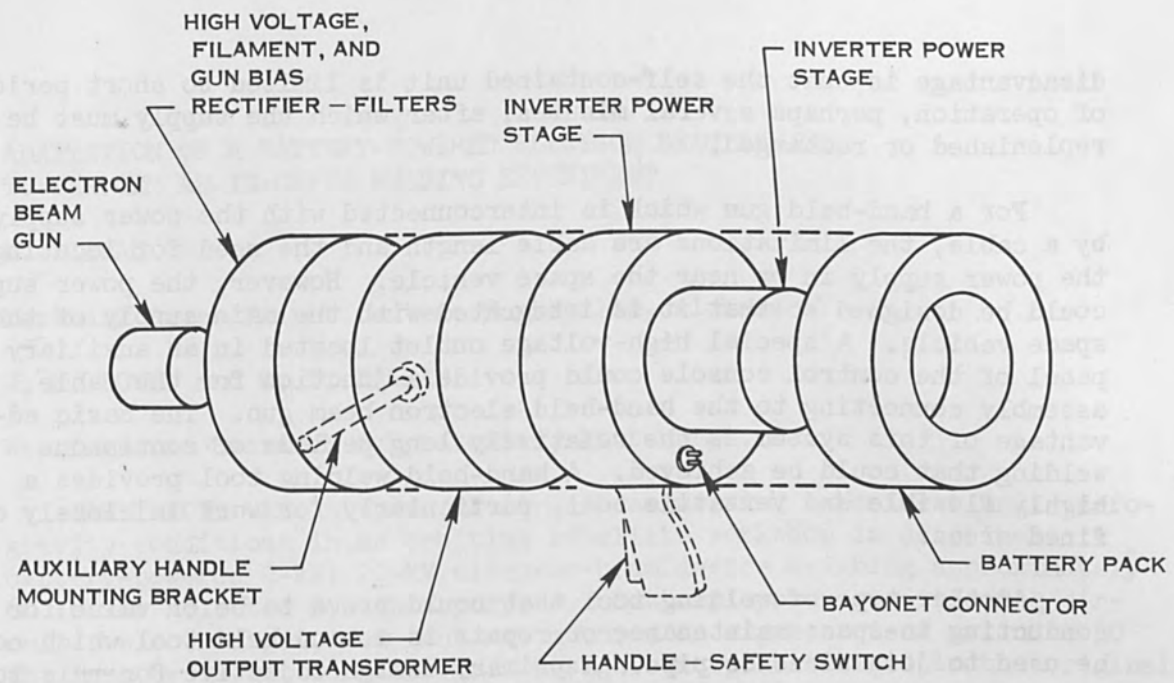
Packaging concept for a self-contained 0.5-kW welder.
